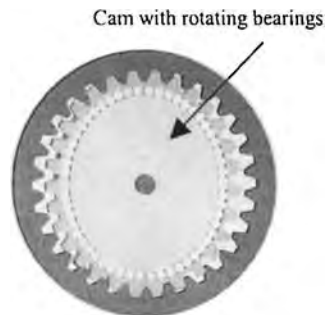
Harmonic drive mechanisms with many rotating bearings.
